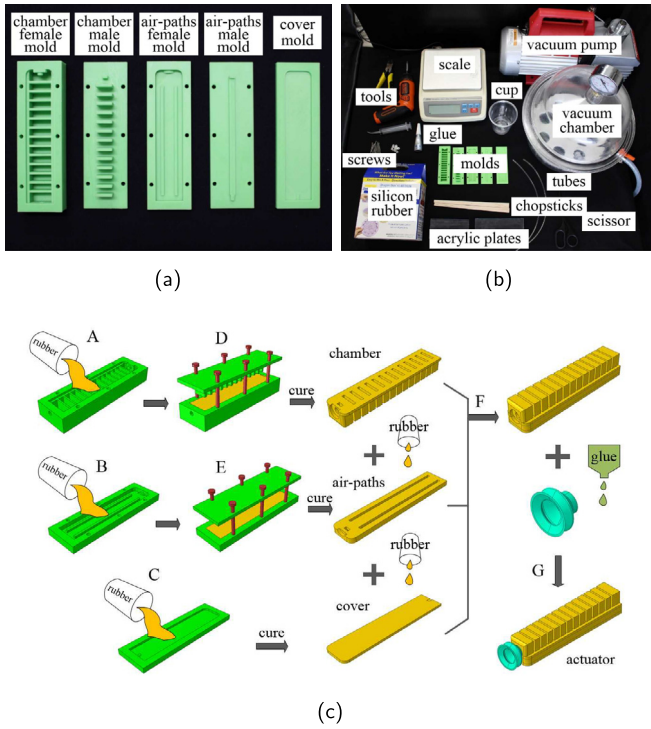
Finger fabrication: (a) 3D printed molds, (b) devices and components used for casting, and (c) the fabrication process.
